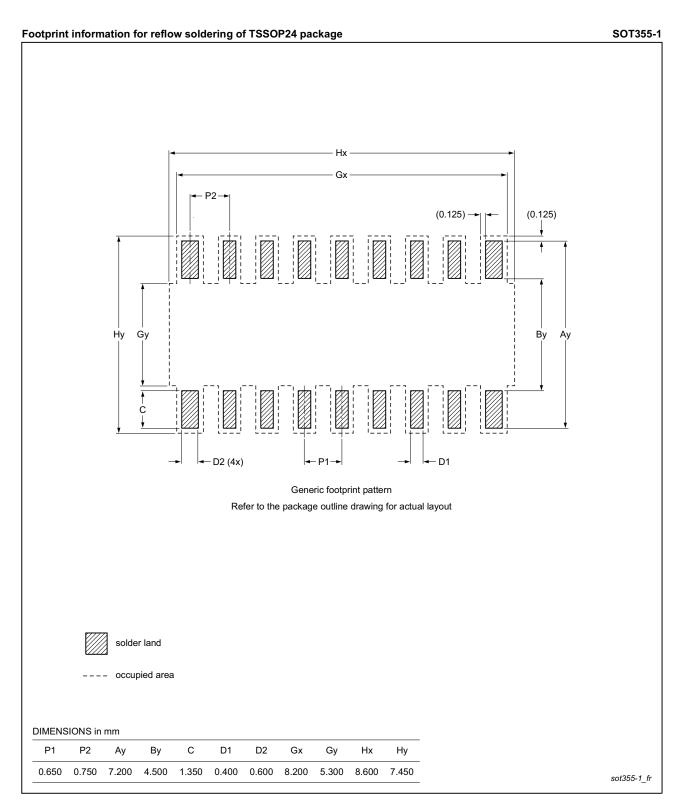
PCB footprint for SOT355-1 (TSSOP24); reflow soldering
